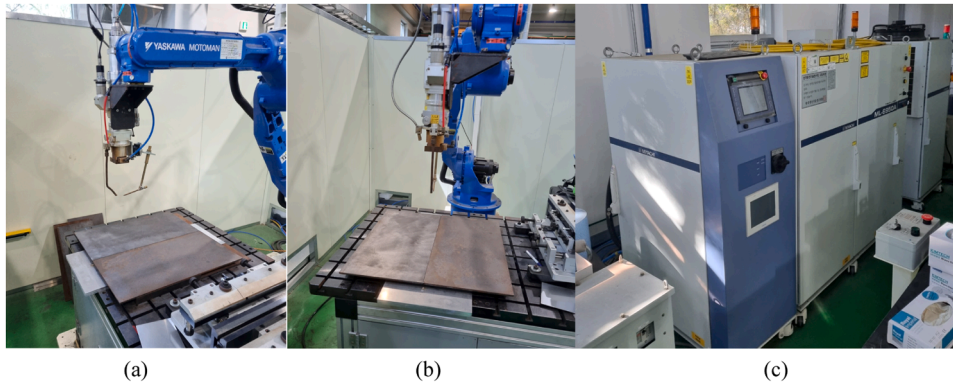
Fiber laser welding system: (a) Side view of the welding machine, (b) Front view of the welding machine, and (c) Laser control system.
